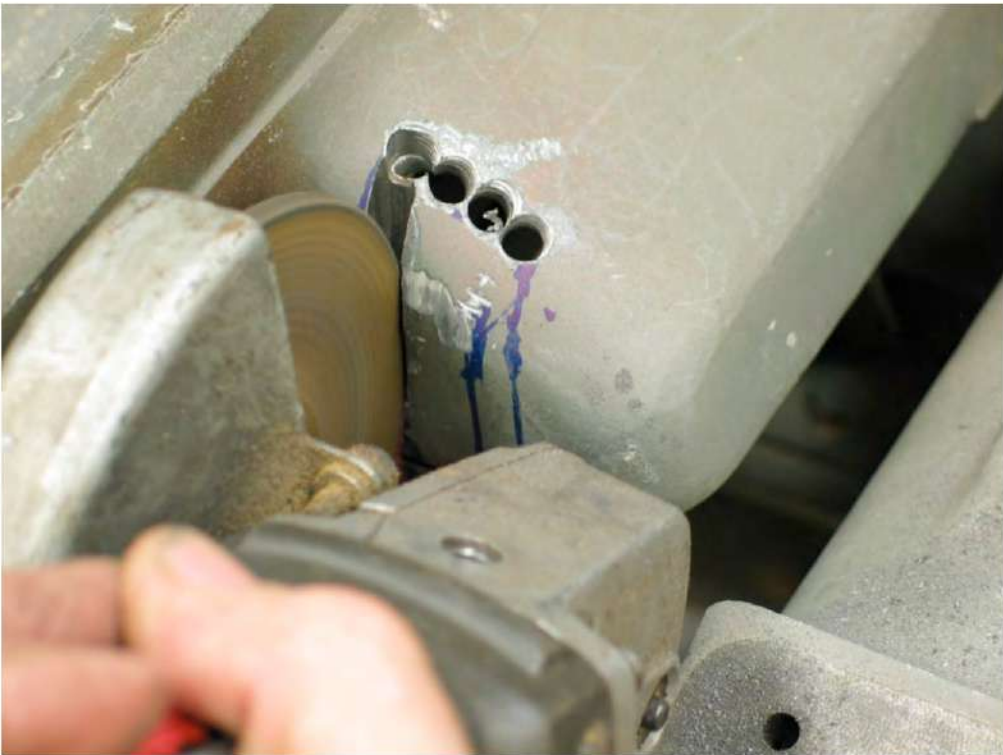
A 4-1/2" angle grinder does quick of cutting a slot up to the holes.
